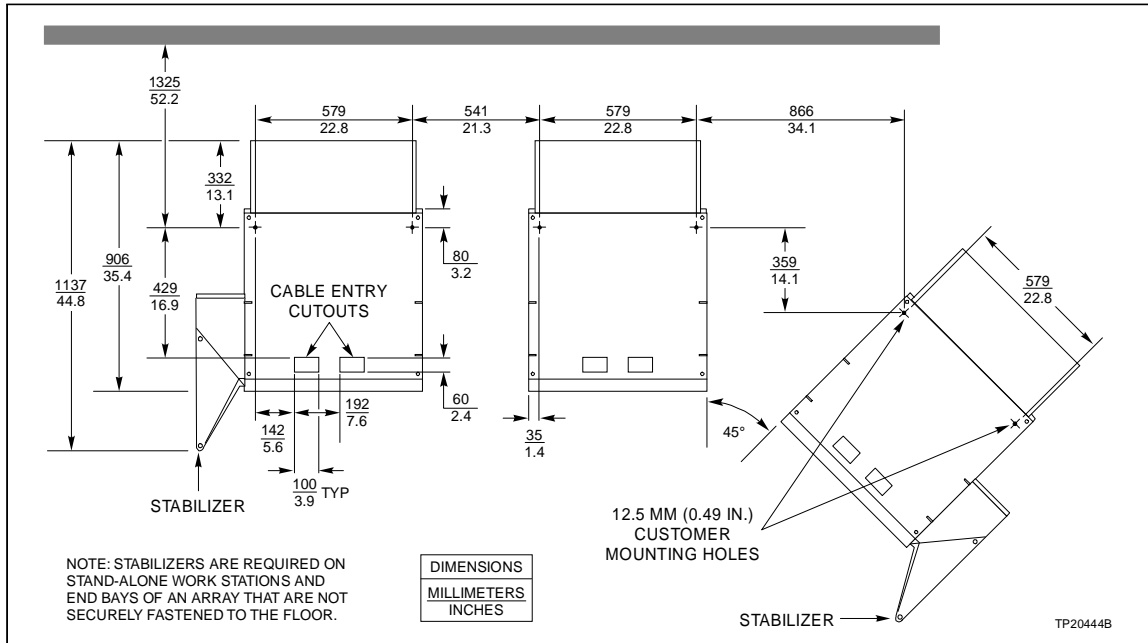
Array Wiring Access and Mounting Dimensions (Typical)
